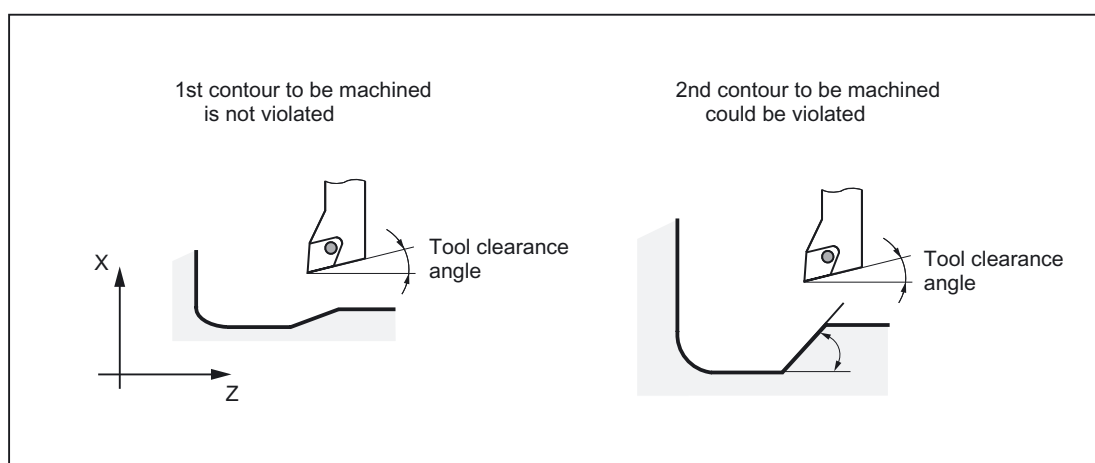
Tool clearance angle of the turning tool during relief cutting
